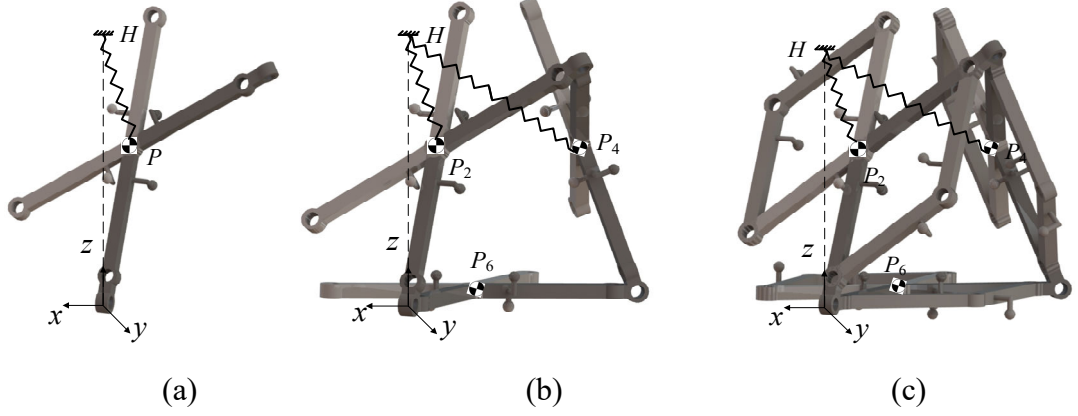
Statically balanced mechanisms using auxiliary links and springs: (a) 2-DOF manipulator; (b) Bricard linkage; (c) extension of Bricard linkage
